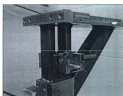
After machining, the pivot shafts were test fit in their bores.
